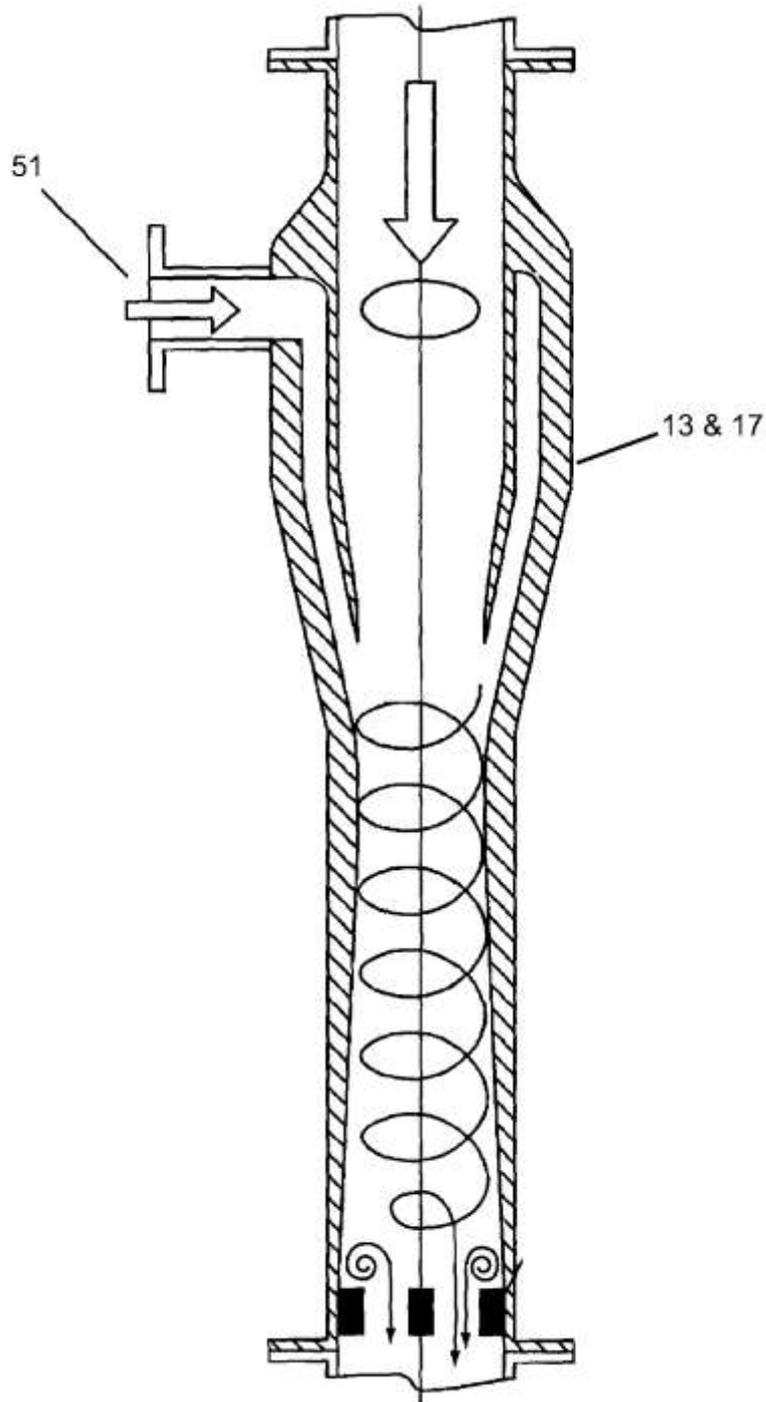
Side cutaway view of a venturi injector in one embodiment
